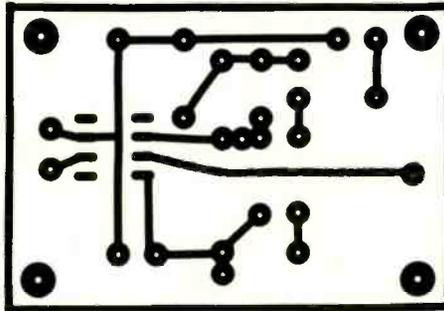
Actual-size etching-and-drilling guide for making printed-circuit board that can be used instead of using perforated board.
